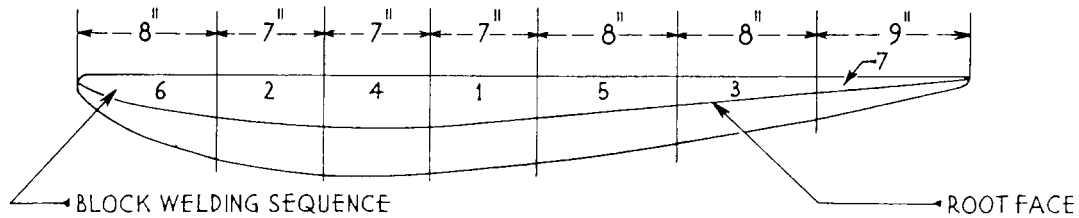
POSITION OF ROOT FACE AFTER PREPARATION, ILLUSTRATING TYPICAL SPACING OF BLOCKS, AND SEQUENCE OF WELDING (THICKNESS EXAGGERATED)
